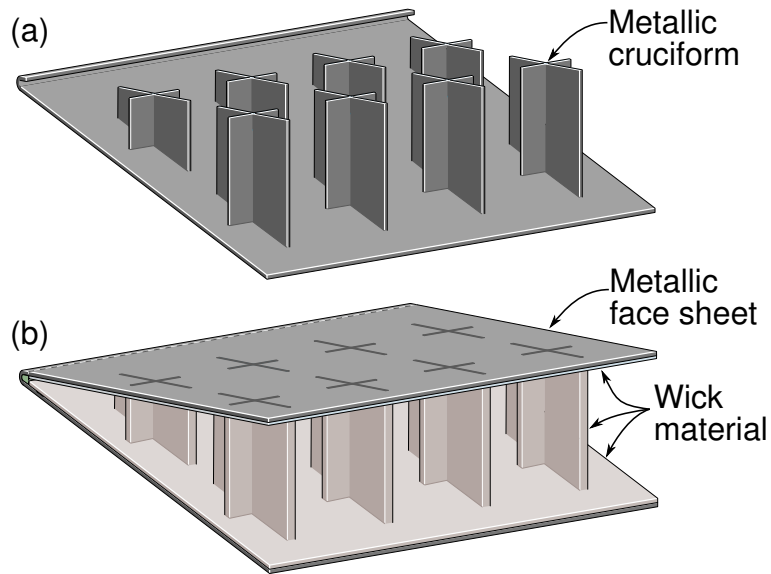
A structural heat pipe for the leading edge of a hypersonic vehicle showing (a) a cutaway view with the metallic wick material removed to show the cruciform structural members; and (b) the assembly, with both metallic faces and the wick installed.
